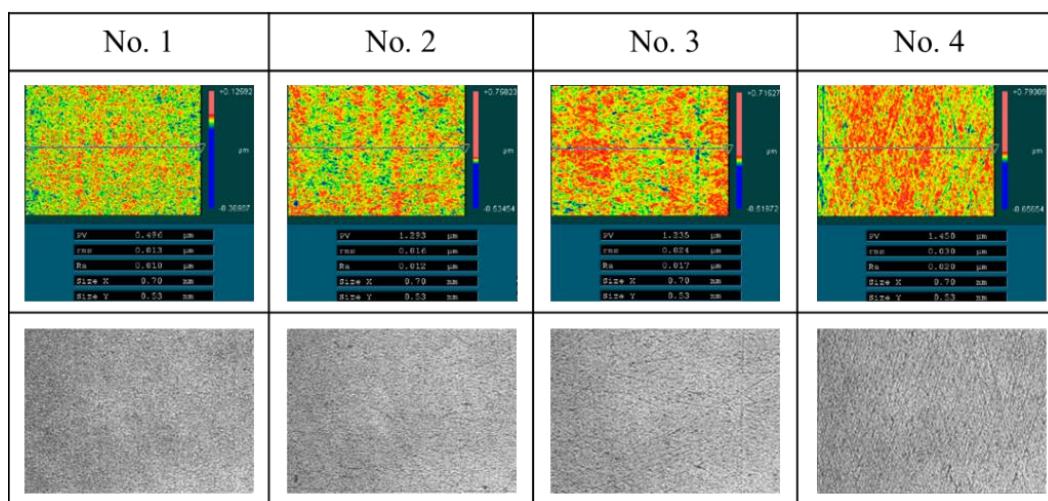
Non-contact 3D measurement and SEM photographs of finished surface in multi-stage magnetic abrasive finishing after 60 min MAF process
